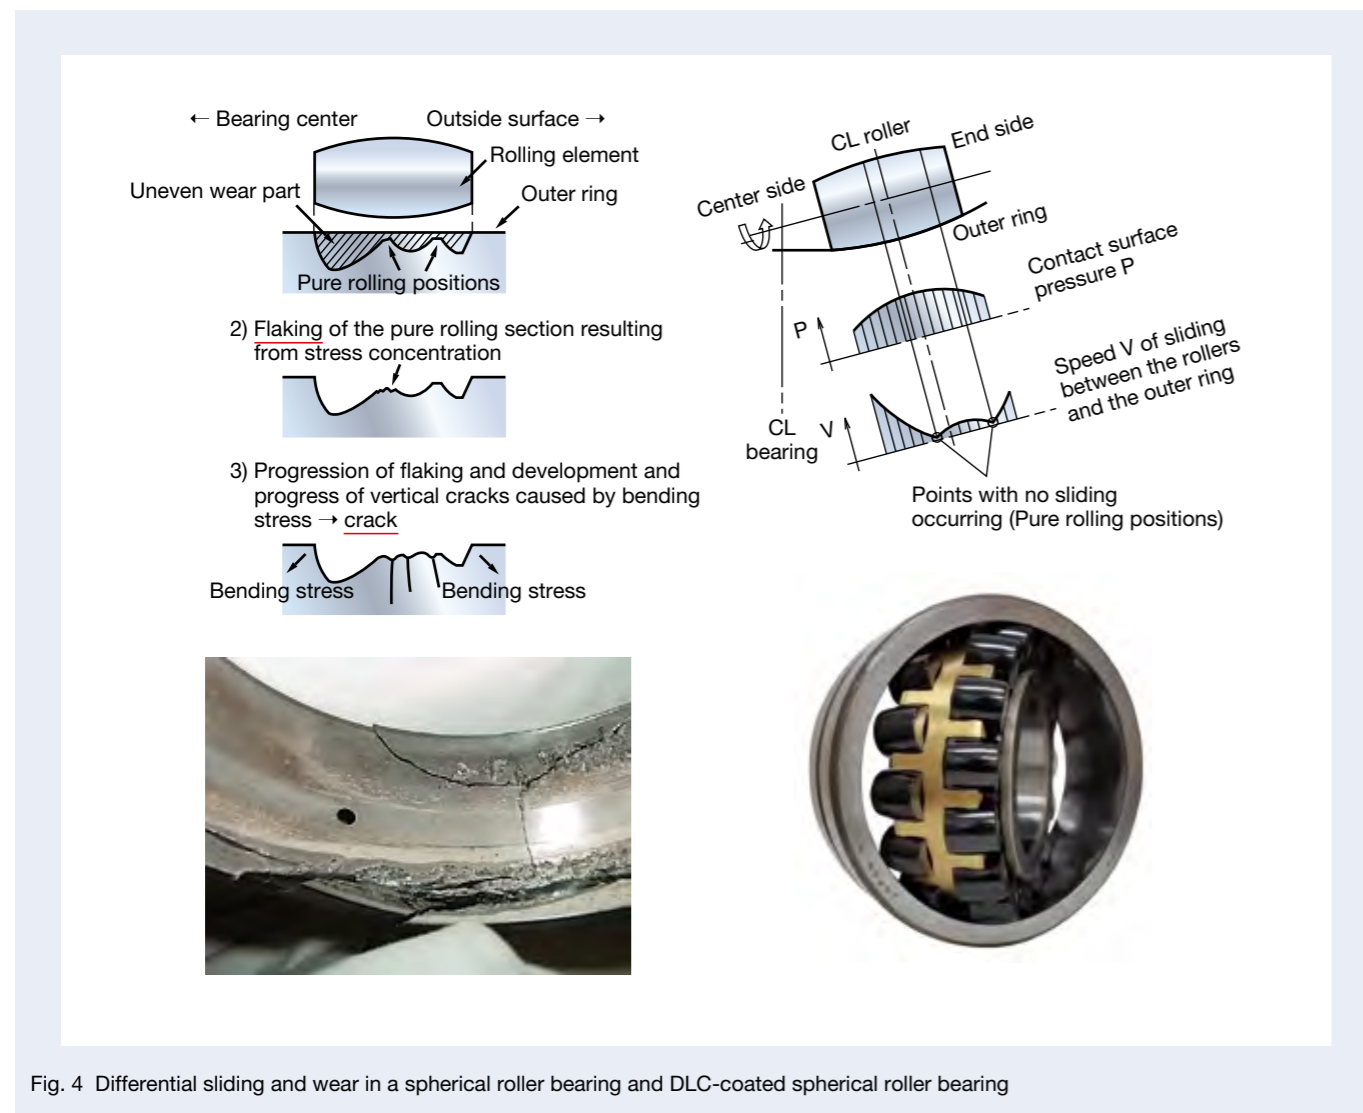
Differential sliding and wear in a spherical roller bearing and DLC-coated spherical roller bearing
